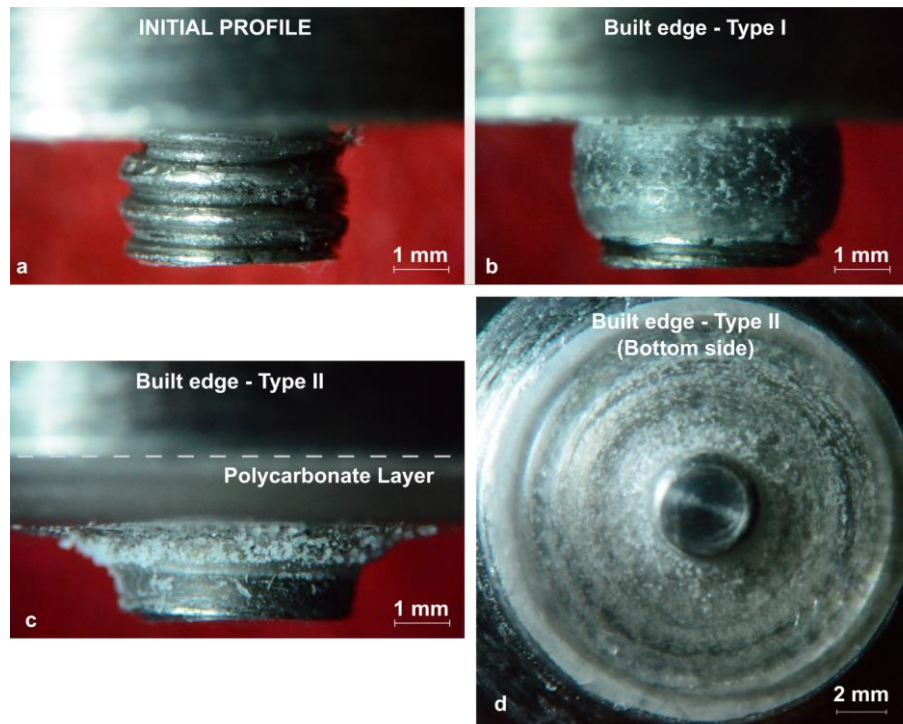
Side view of the tool pin (a) Initial profile, (b) BUE on the pin, (c) BUE on the pin and under the shoulder and (d) bottom view of the BUE under the tool shoulder.
